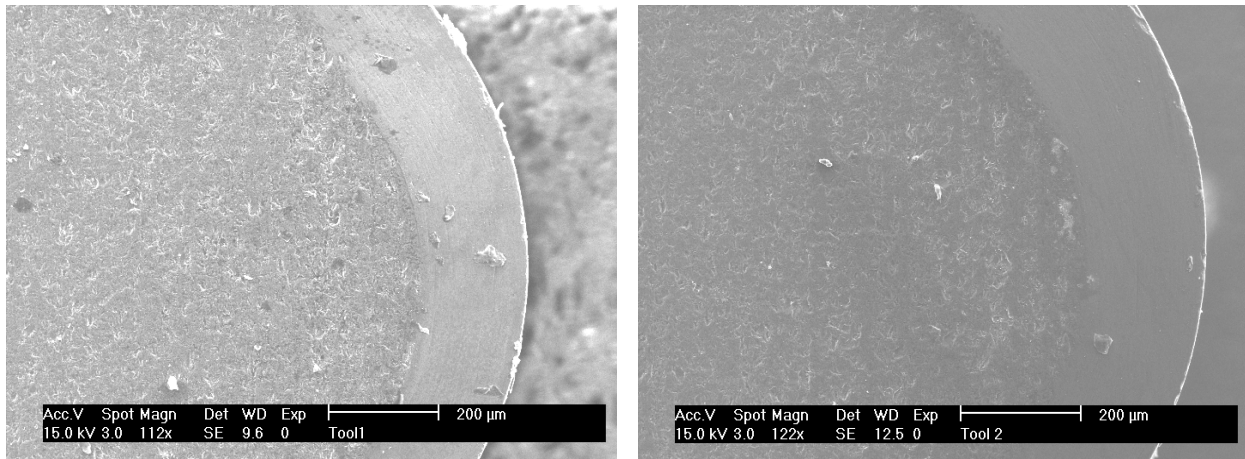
SEM micrographs of the chamfer and rake faces of two $B_6O/Y_2O_3/Al_2O_3$ cutting tools showing surface porosity.
